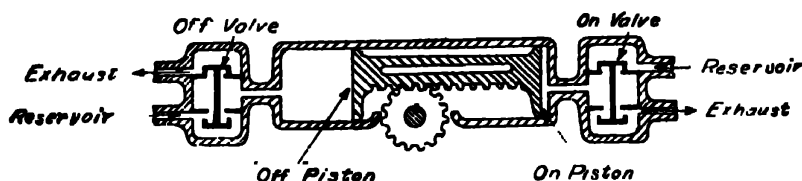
Cross-Section of Operating Cylinder, Piston and Guides
